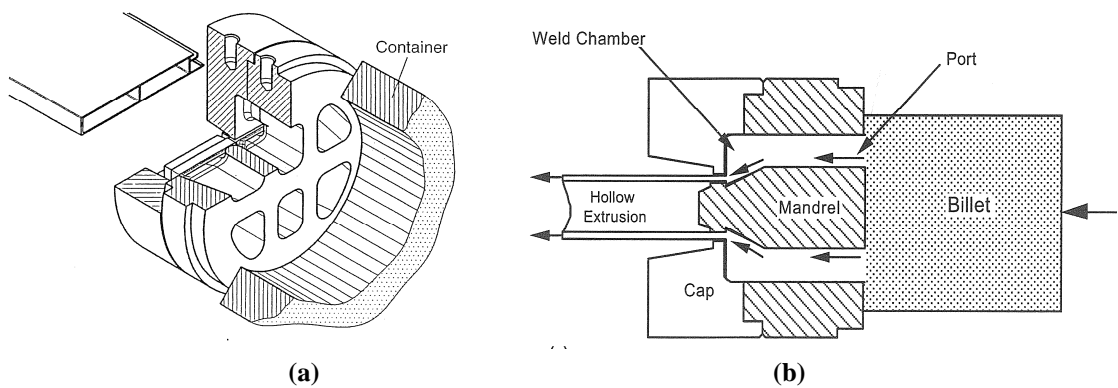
Single cavity two parts porthole (a) die with six ports to produce aluminium hollow sections [Bauser et al.,2006] and schematic representation (b) of the welding chamber of a hollow die [Saha,2000].
